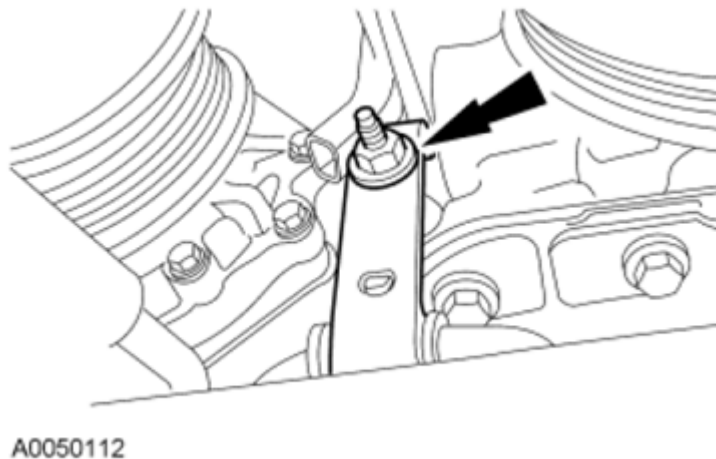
Locating Power Steering Tube Bracket Mounting Nut
